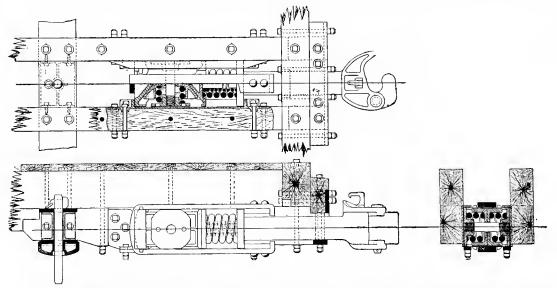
Republic Friction Draft Gear for Freight Cars with Wooden Sills. Western Railway Equipment Company.
